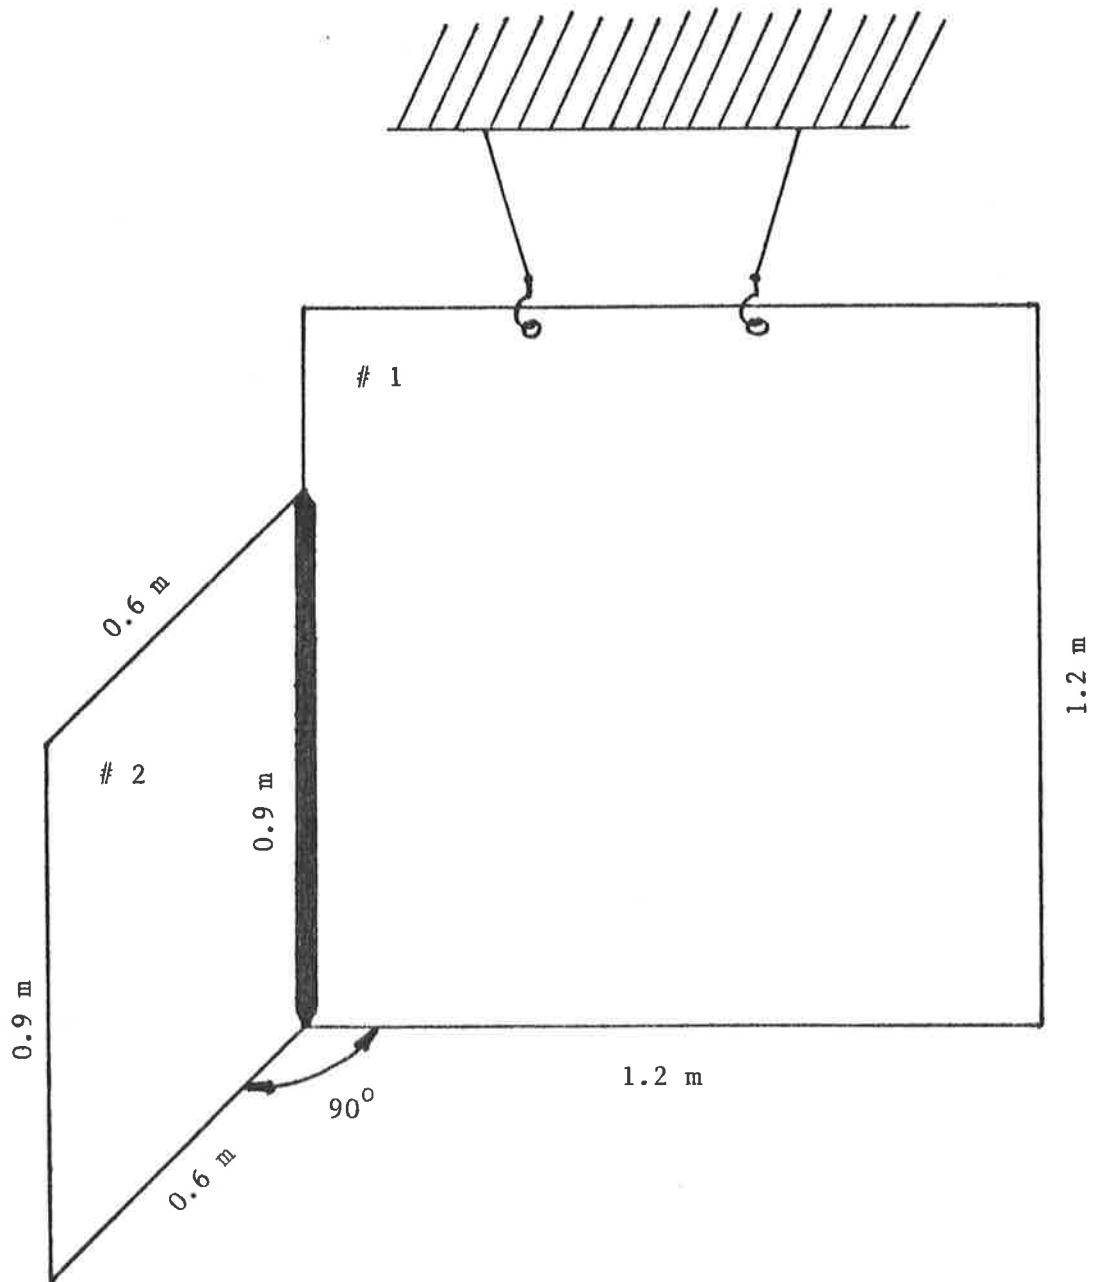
Test-structure : two thin steel plates welded together
